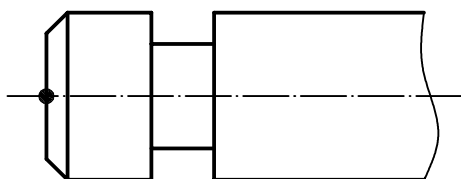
Flanged piston rod end with TRP at the end of the piston rod
